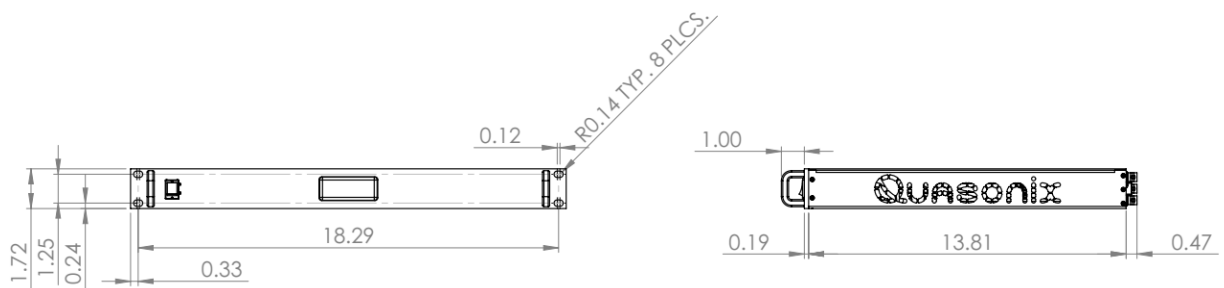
Mechanical Drawing – 1U Front and Side Views - EVTm 1U Rack Mount Encoder/Decoder
